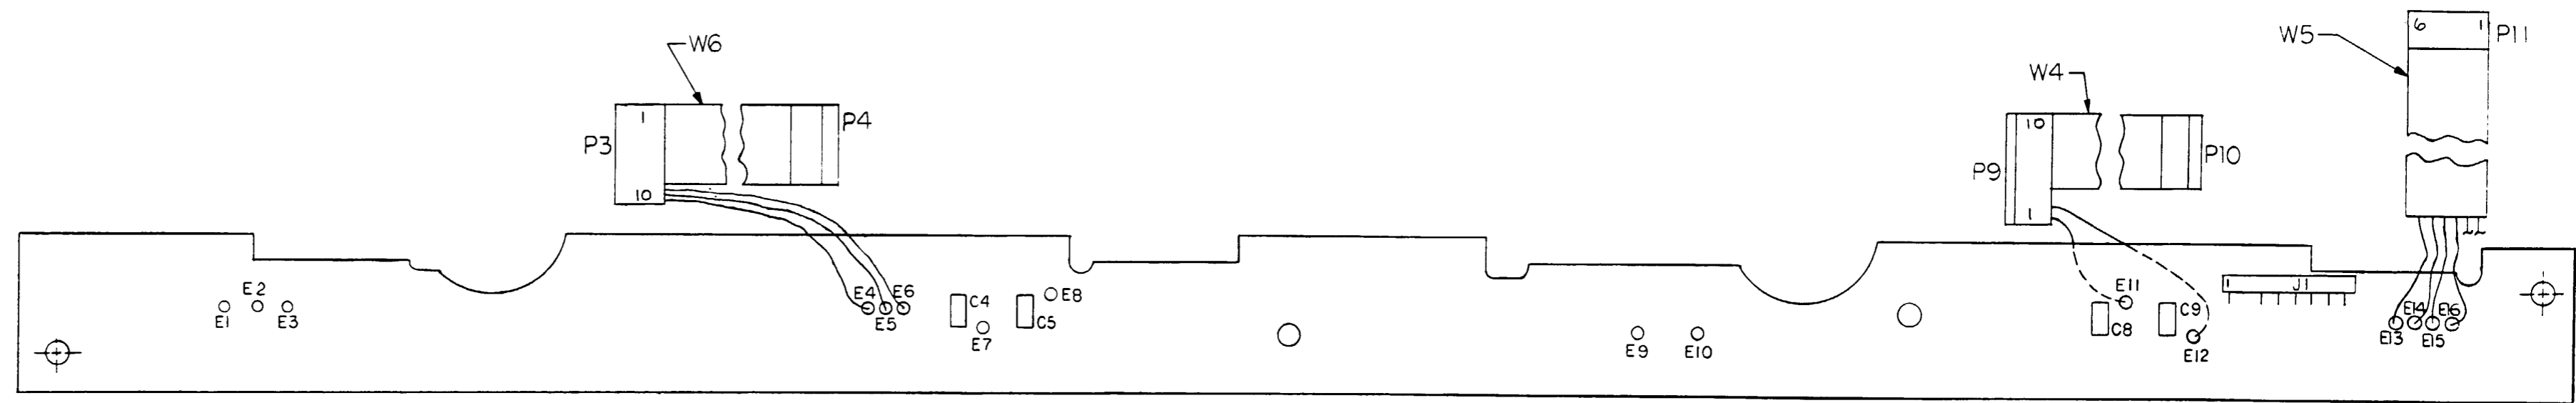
Front Power Distribution Assembly A16A1 Component Locations (10215-1200)
